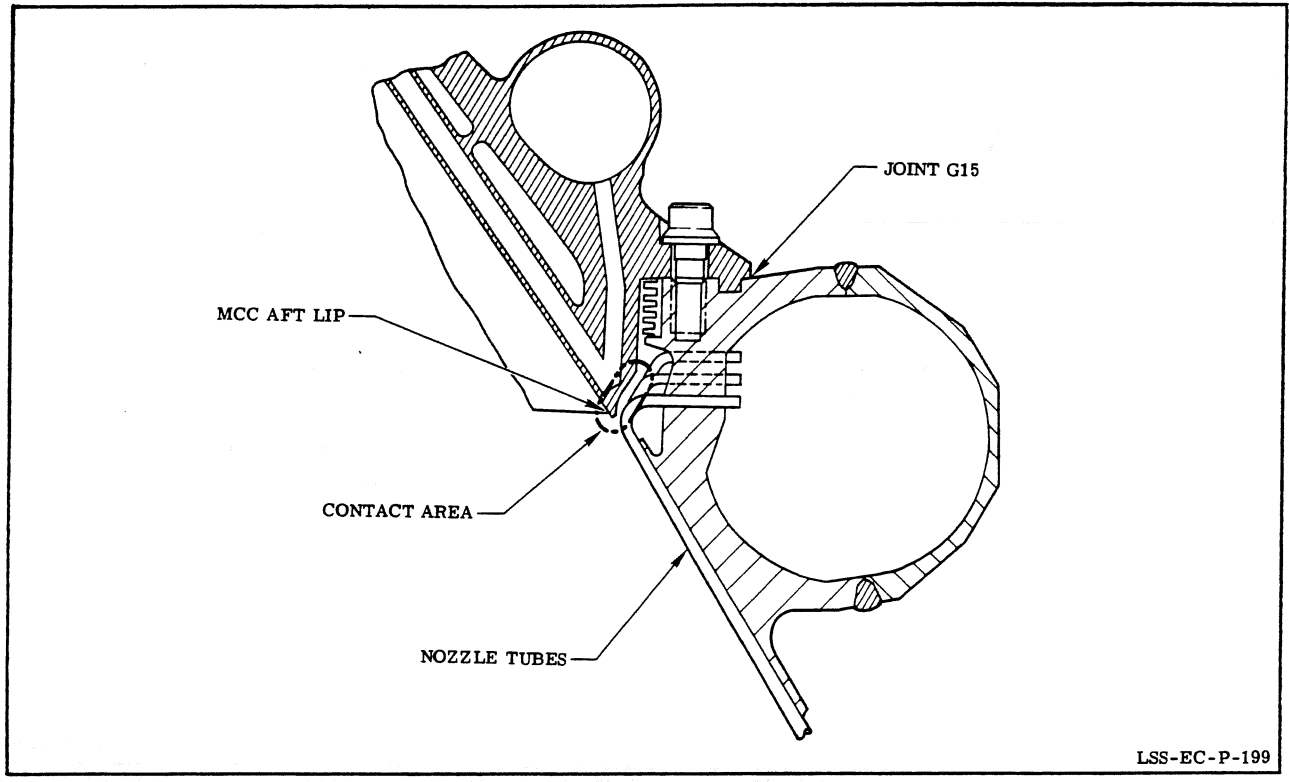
Nozzle Coolant Tube-to-MCC Clearance
